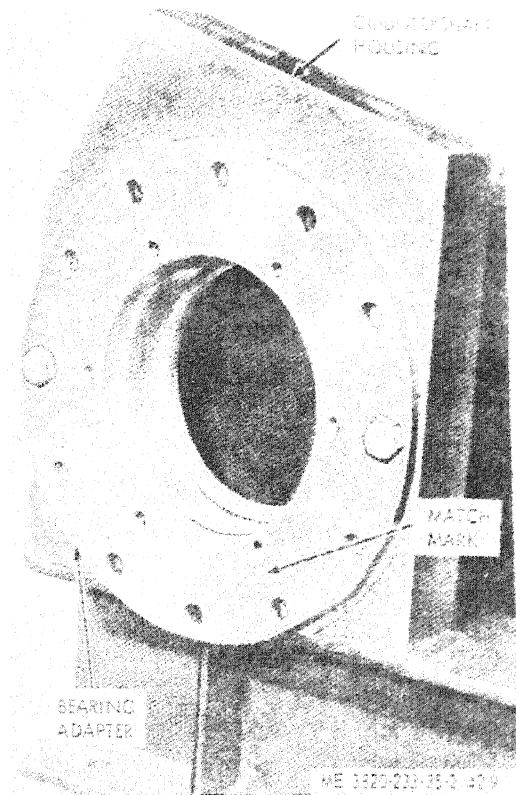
Bearing adapter-to-countershaft housing alinement.
